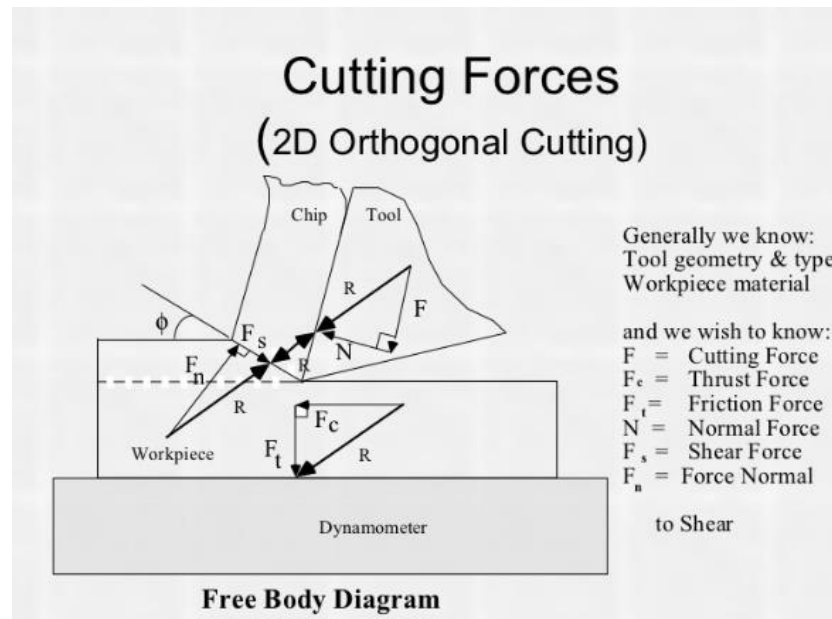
Schematic diagram of the forces at the cutting tool insert and the chip interface [68] .
